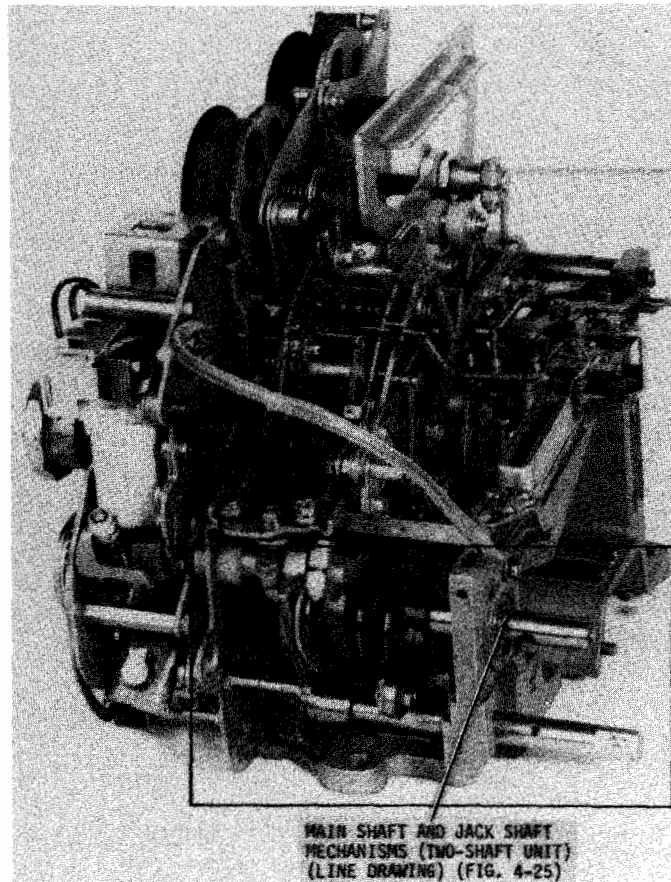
Main Shaft and Jack Shaft Mechanism, Two-Shaft Units
